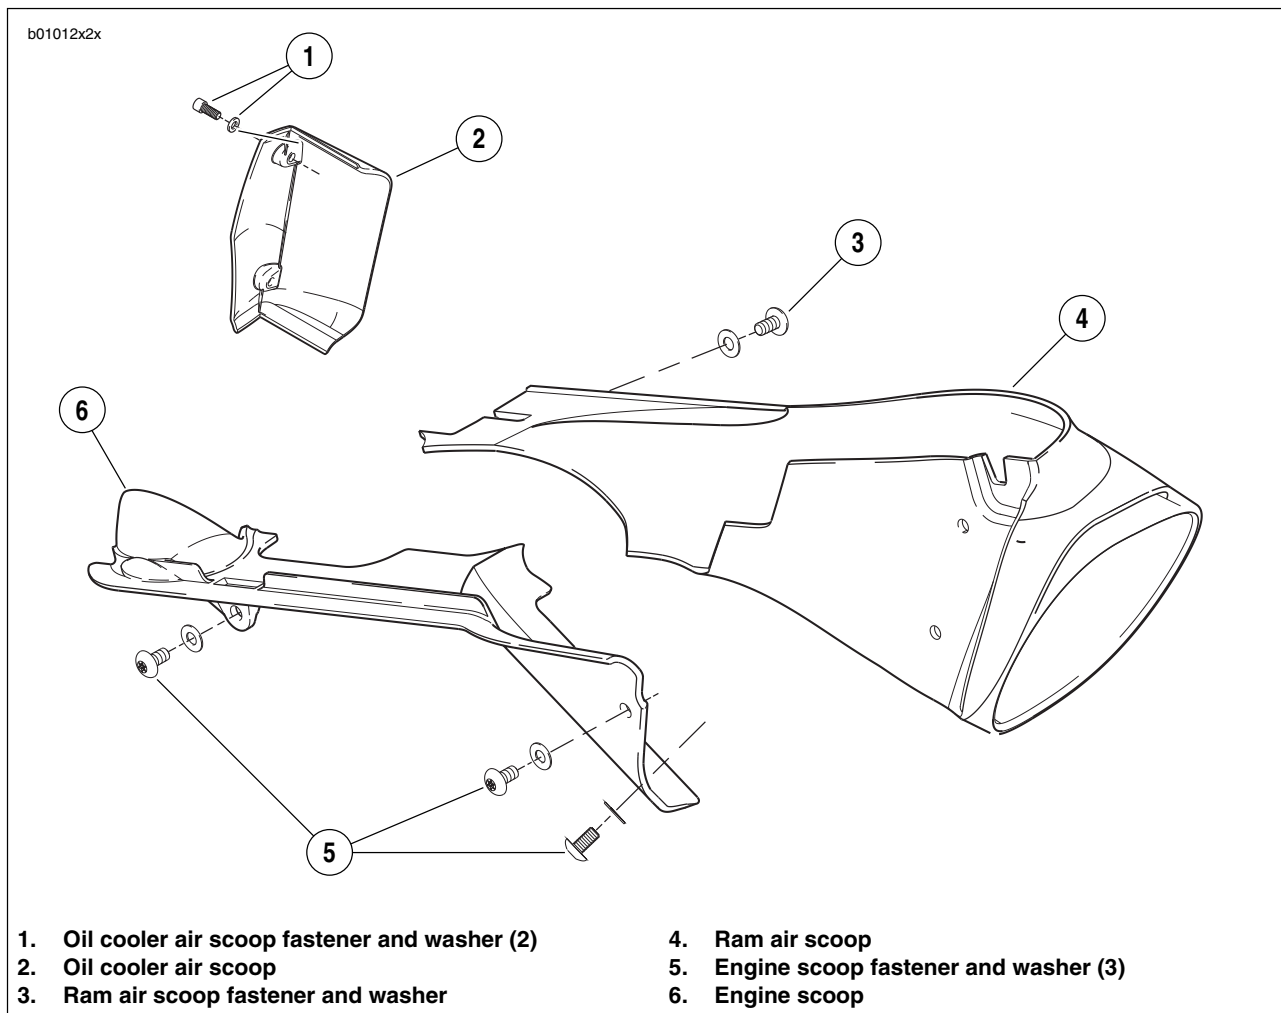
RAM Air Scoop, Engine Shroud, Oil Cooler
